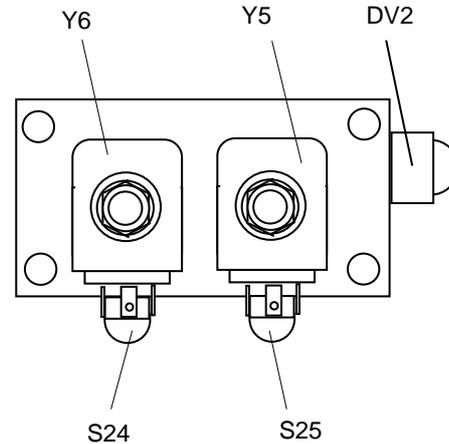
External view of the solenoid valve block of the hydraulic Vi-adjustment
